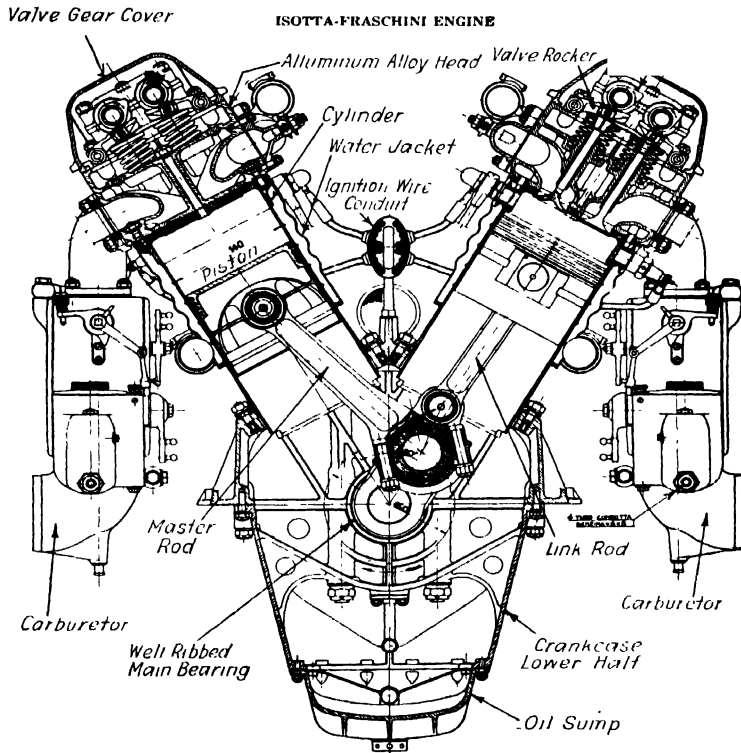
Transverse Sectional View of Isotta-Fraschini Aviation Engine Showing Cylinder and Head Construction Employed.
